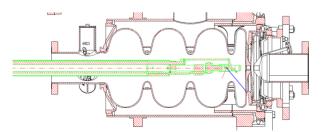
Drawing of 3.5 cell SRF gun cavity with optical inspection system.
